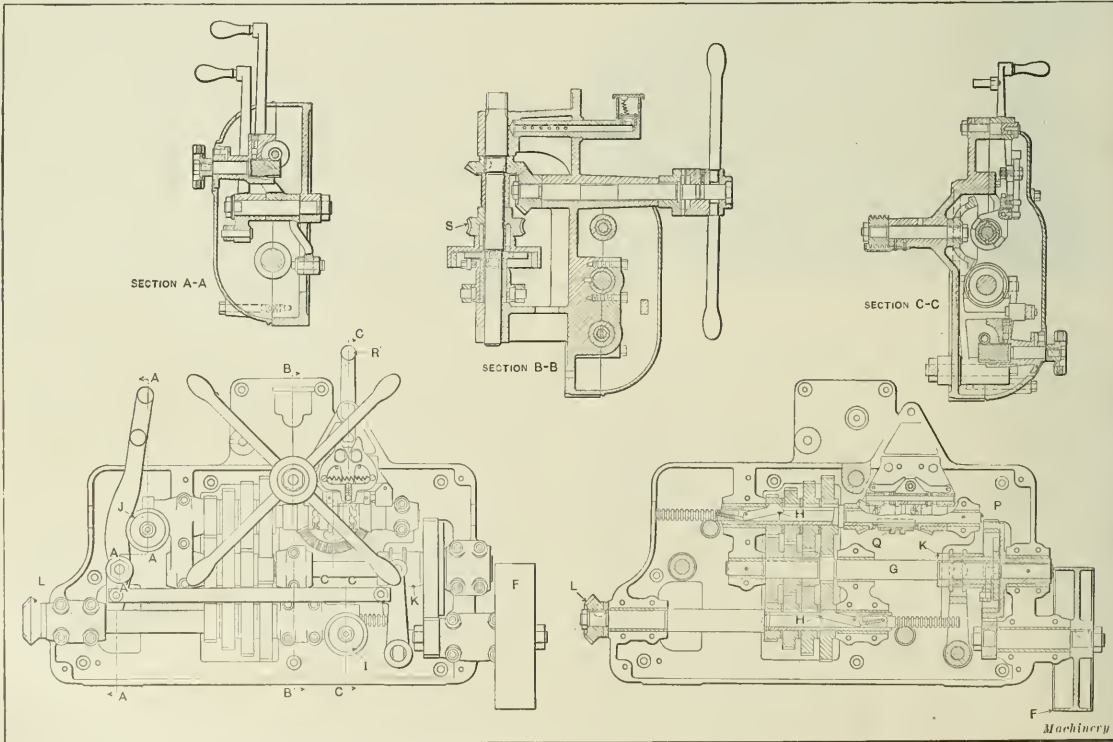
Arrangement of Gearing in Speed and Feed Box, and Transmission to Wheel-spindle Slide
